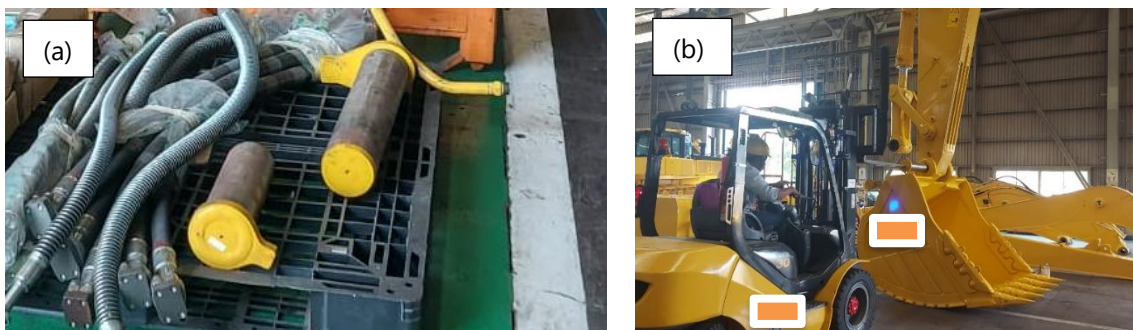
Findings on the length of the sanding process (a) Pin and (b) Removing pin
